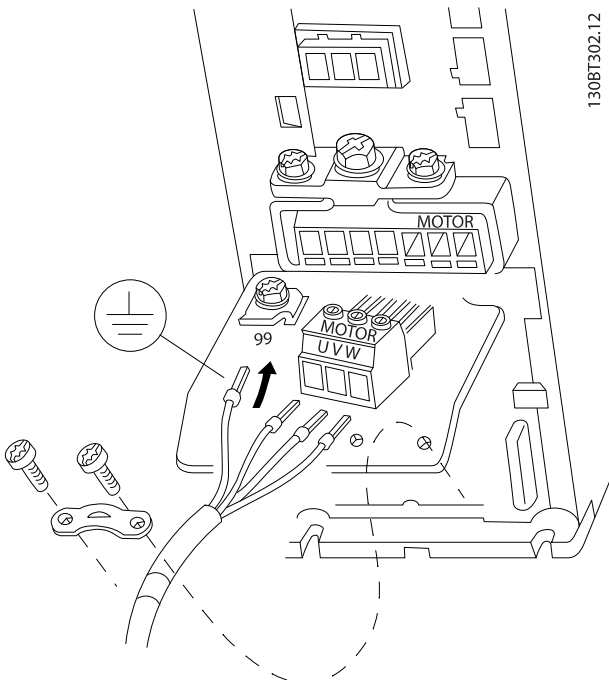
Connecting the Frequency Converter to the Motor, Enclosure Size H9
